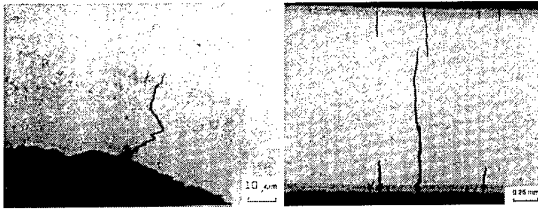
Coating initiated thermal fatigue cracks in a high performance turbine components (a) close-up of coating crack; (b) evidence of cracks having propagated through wall of component [Courtesy of Orenda Aerospace Corporation].
